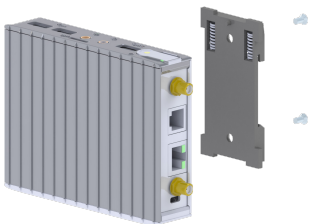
Exploded view of the process to mount the DIN rail bracket on the gateway
